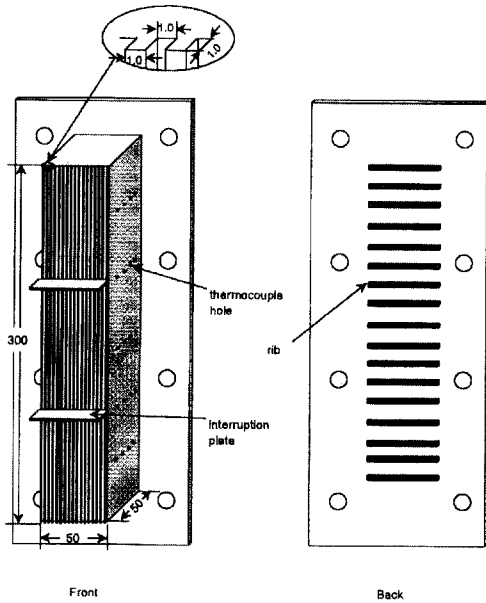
Schematic drawing of test specimen. (Unit: mm)
